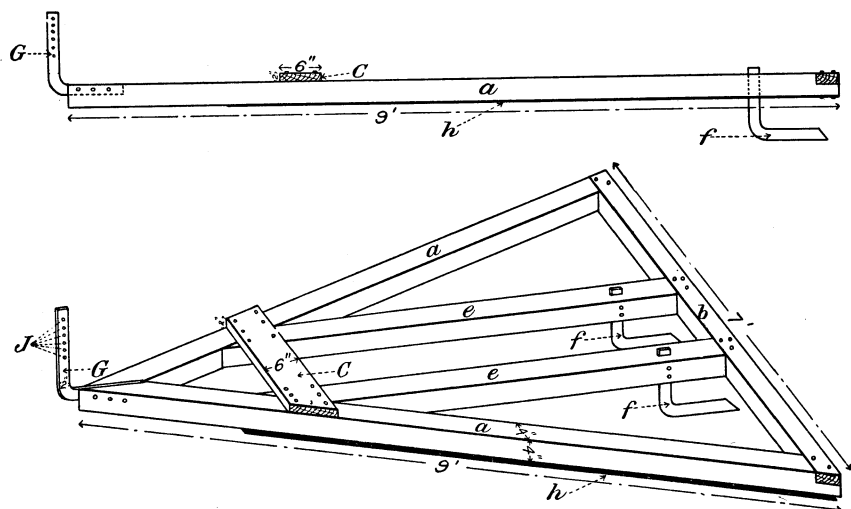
The V-shaped cotton-stalk cutter, side view and perspective.
